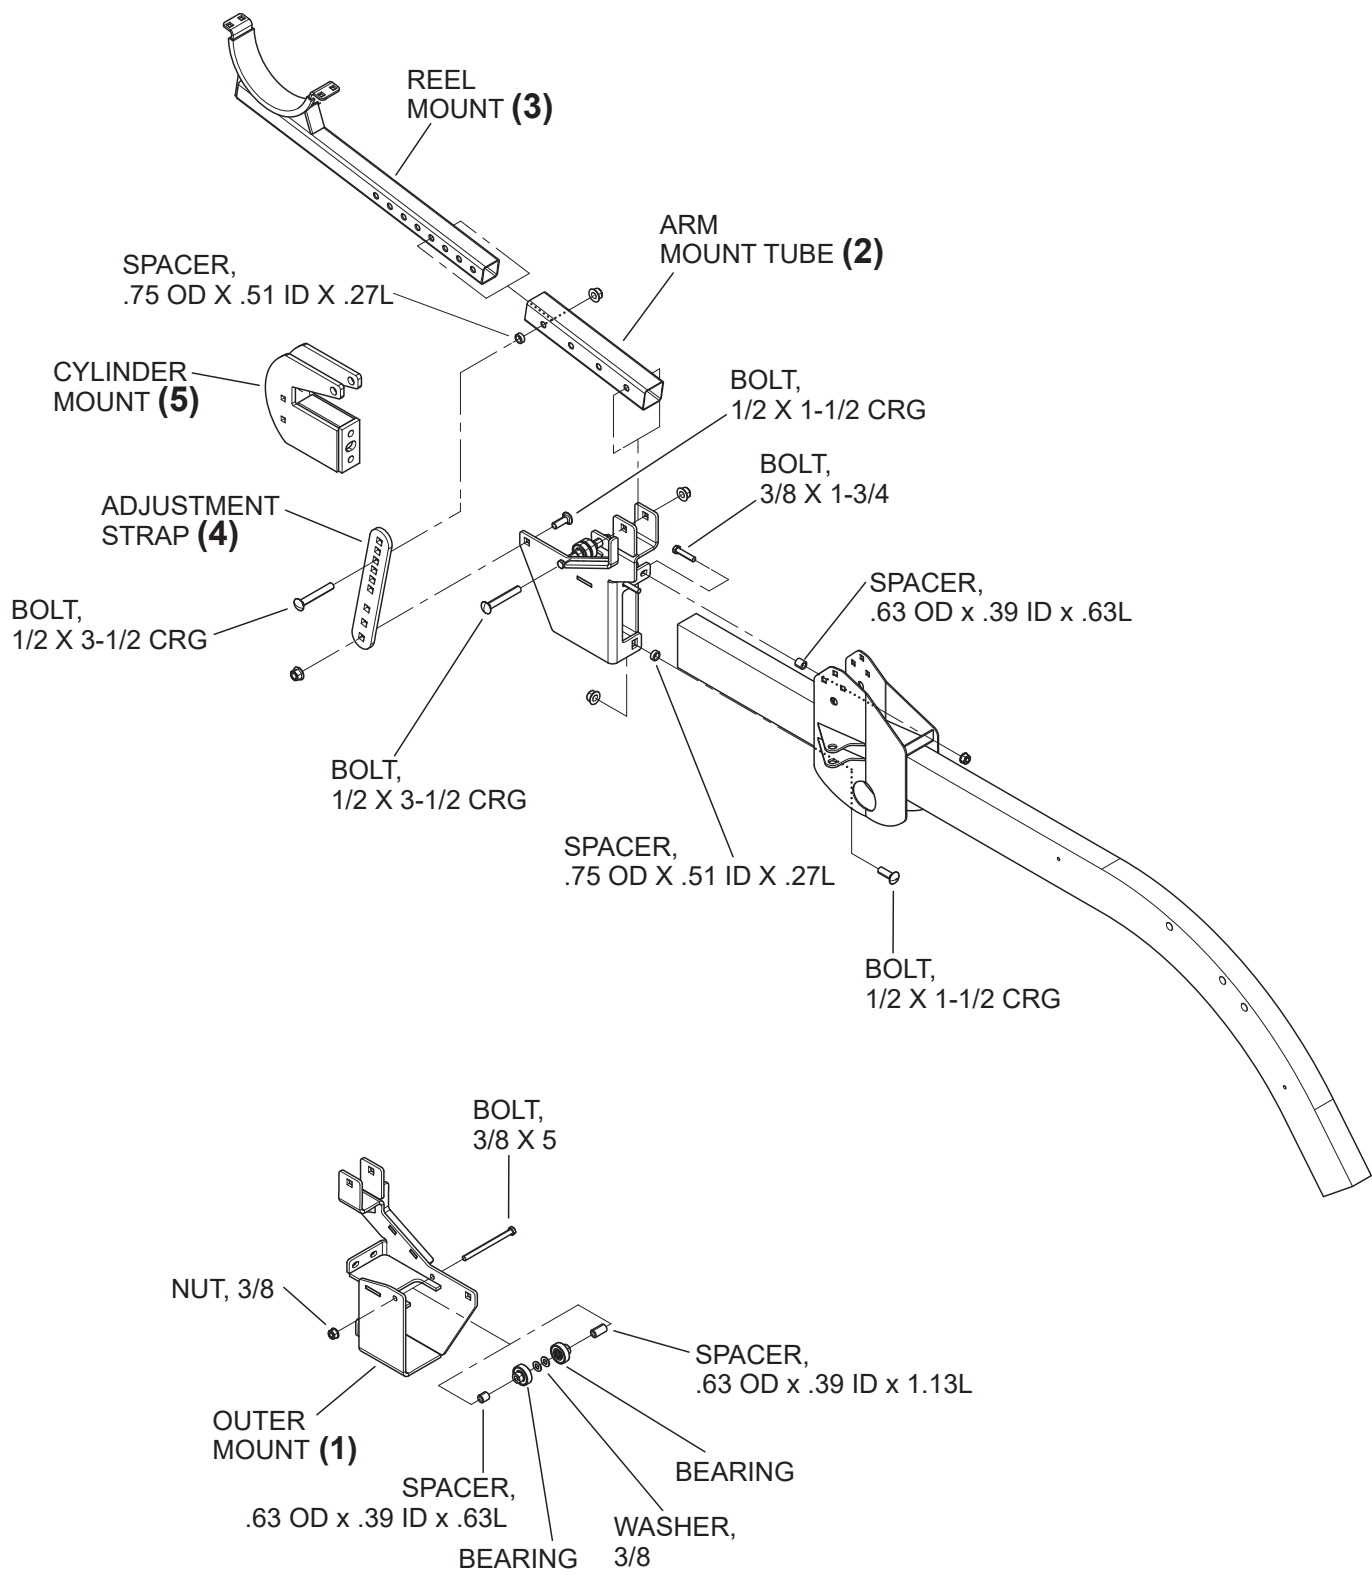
LH reel arm mount assembly (FD70 & CIH 2162 headers)
